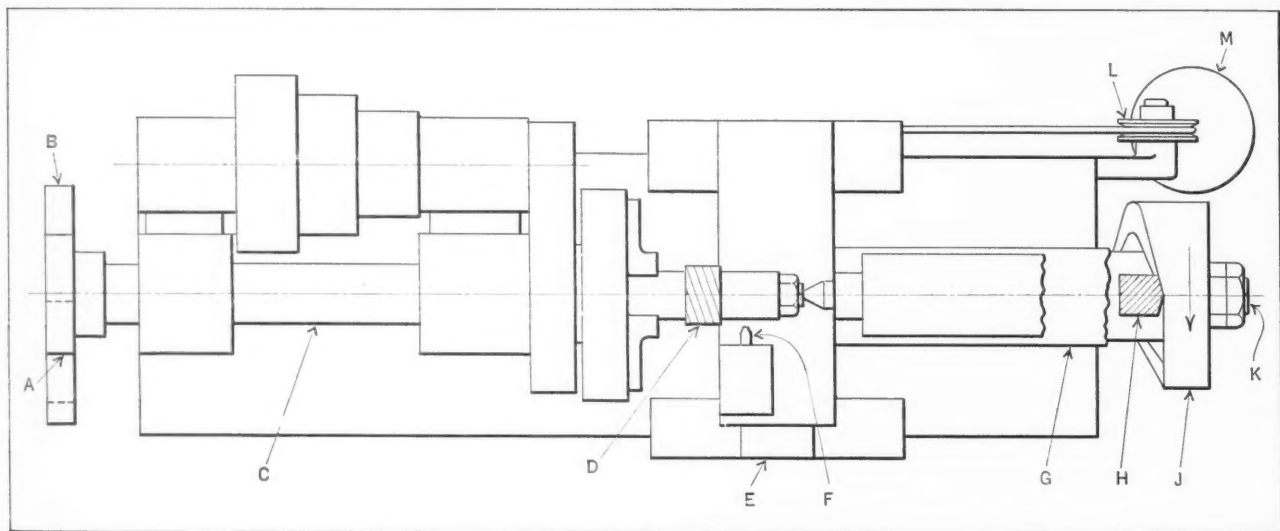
Redesigned Automatic Threading Lathe in which a Simple Cam and Change-gears Serve to Index the Work Smoothly after Each Cut when Chasing Multiple Threads
